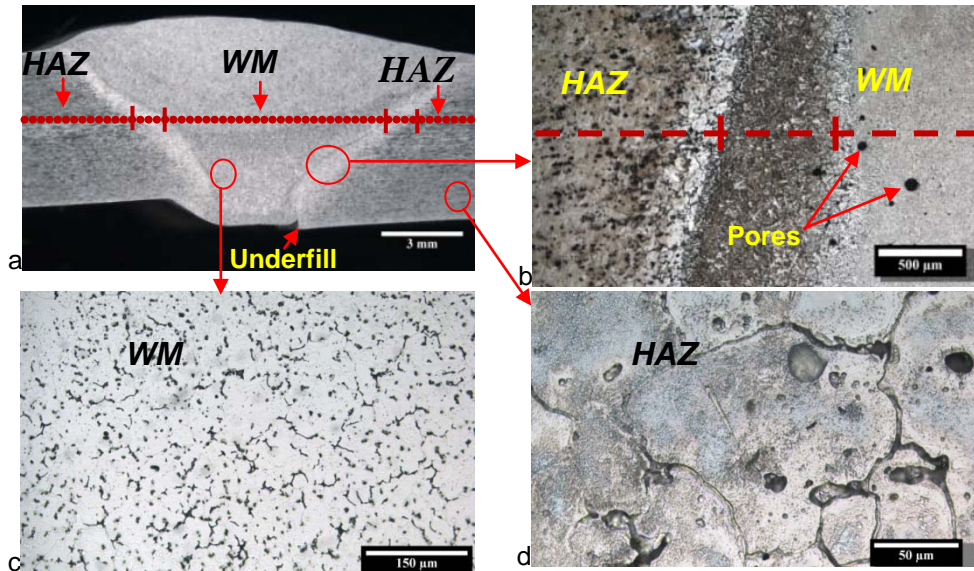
Al6061/ER5356 matching weld, a) 5083/ER5356 undressed weld, b) HAZ/WM interface, c) weld metal and d) HAZ microstructure
